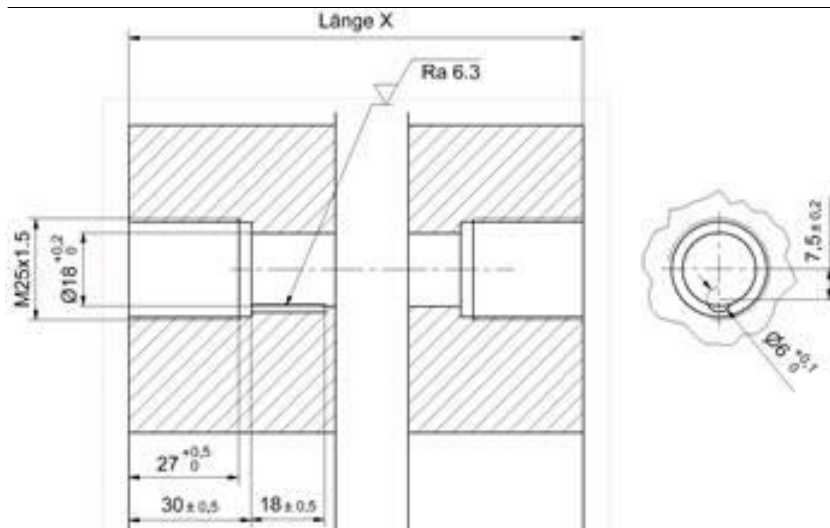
Dimensions of MYUB-ROLL drill hole
